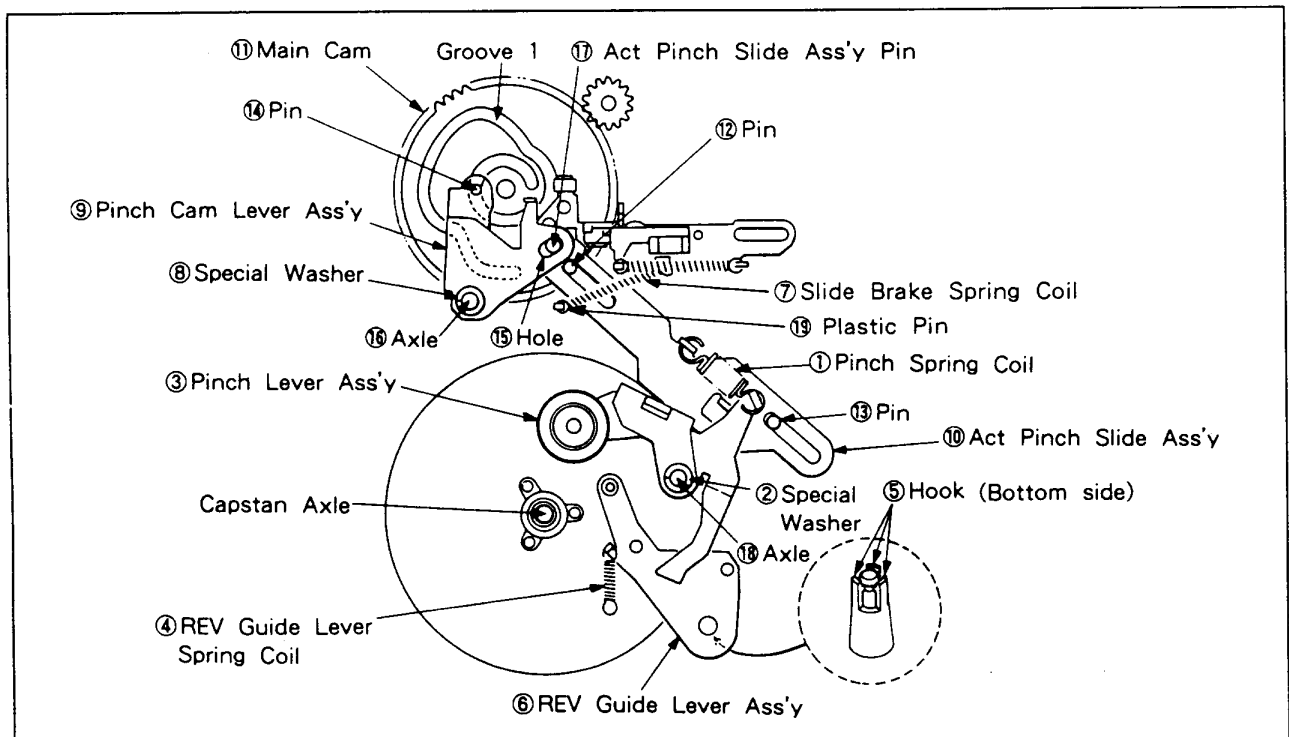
Pinch Roller Pressure Mechanism
